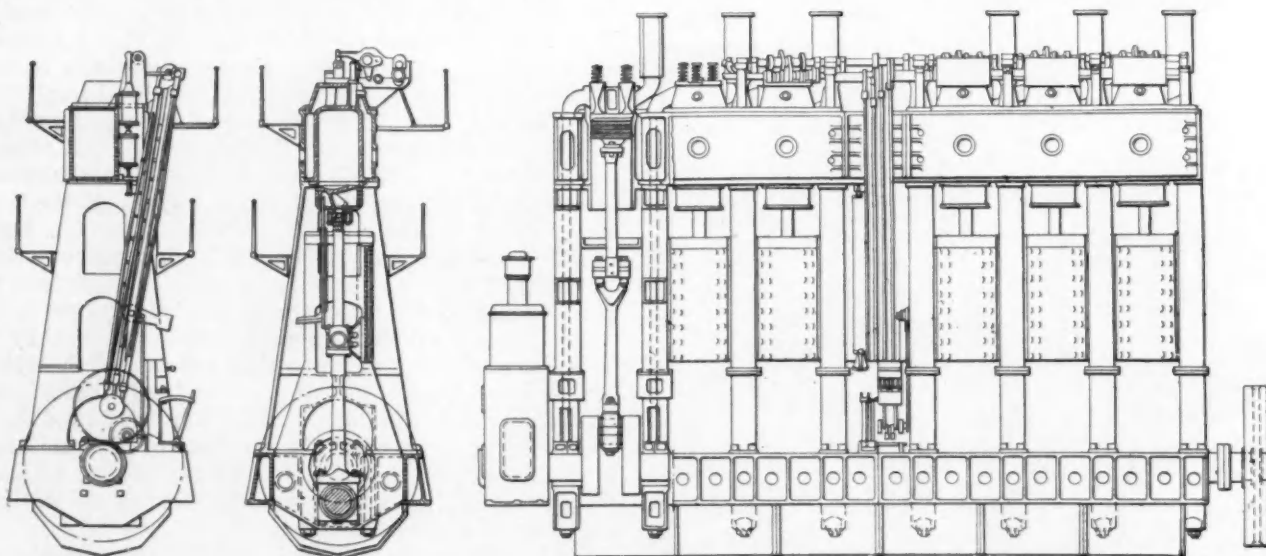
A 2000-I. HP. WERKSPER ENGINE BUILT IN THE UNITED STATES AND HAVING CAST-IRON A-FRAMES EXTENDING FROM THE UNDERSIDE OF THE CYLINDER BOXES TO THE BEDPLATE INSTEAD OF THE STEEL COLUMNS AND DIAGONAL TIERODS OF THE ENGINE SHOWN IN FIG. 4 OR THE COMBINATION FRAME AND COLUMN ARRANGEMENT ILLUSTRATED IN FIG. 6
